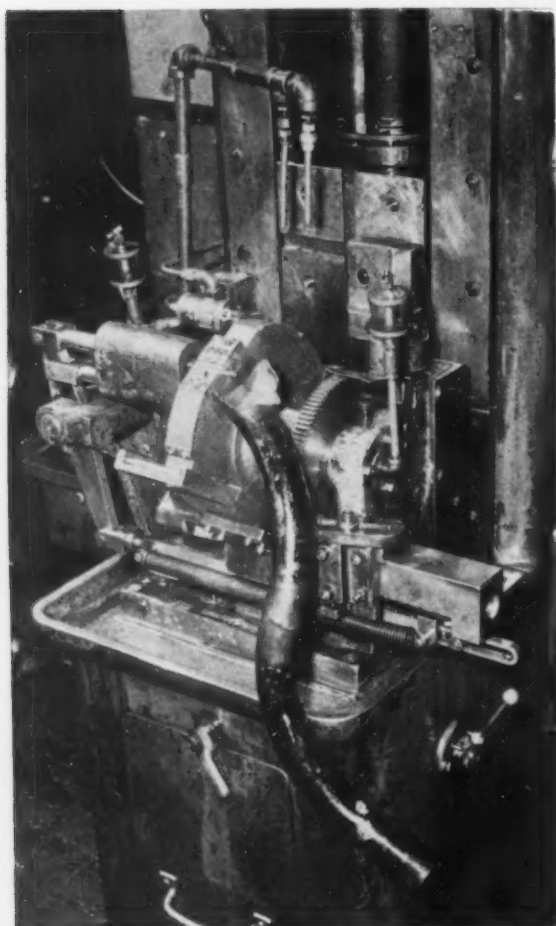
Heavy dial fixture in vertical broaching machine is automatically loaded from a cross slide and indexed into position where work is clamped and broached.
